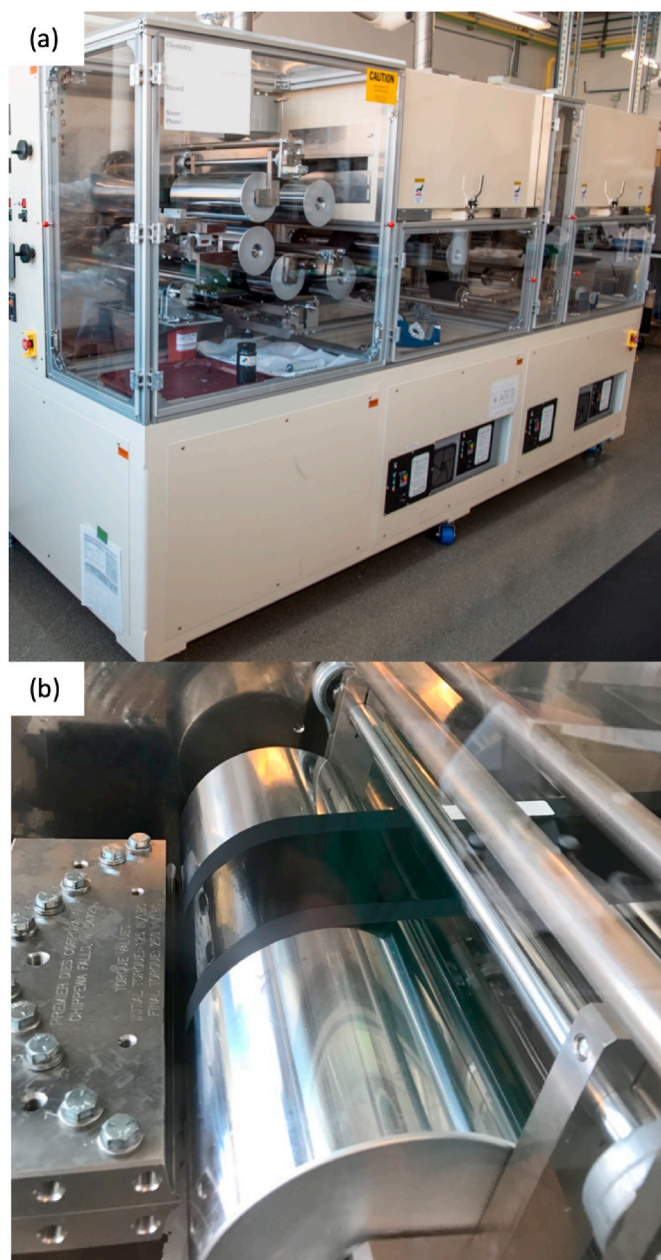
Photographs of the (a) roll-to-roll coating station and (b) slot die coating the catalyst layer on gas diffusion media.
